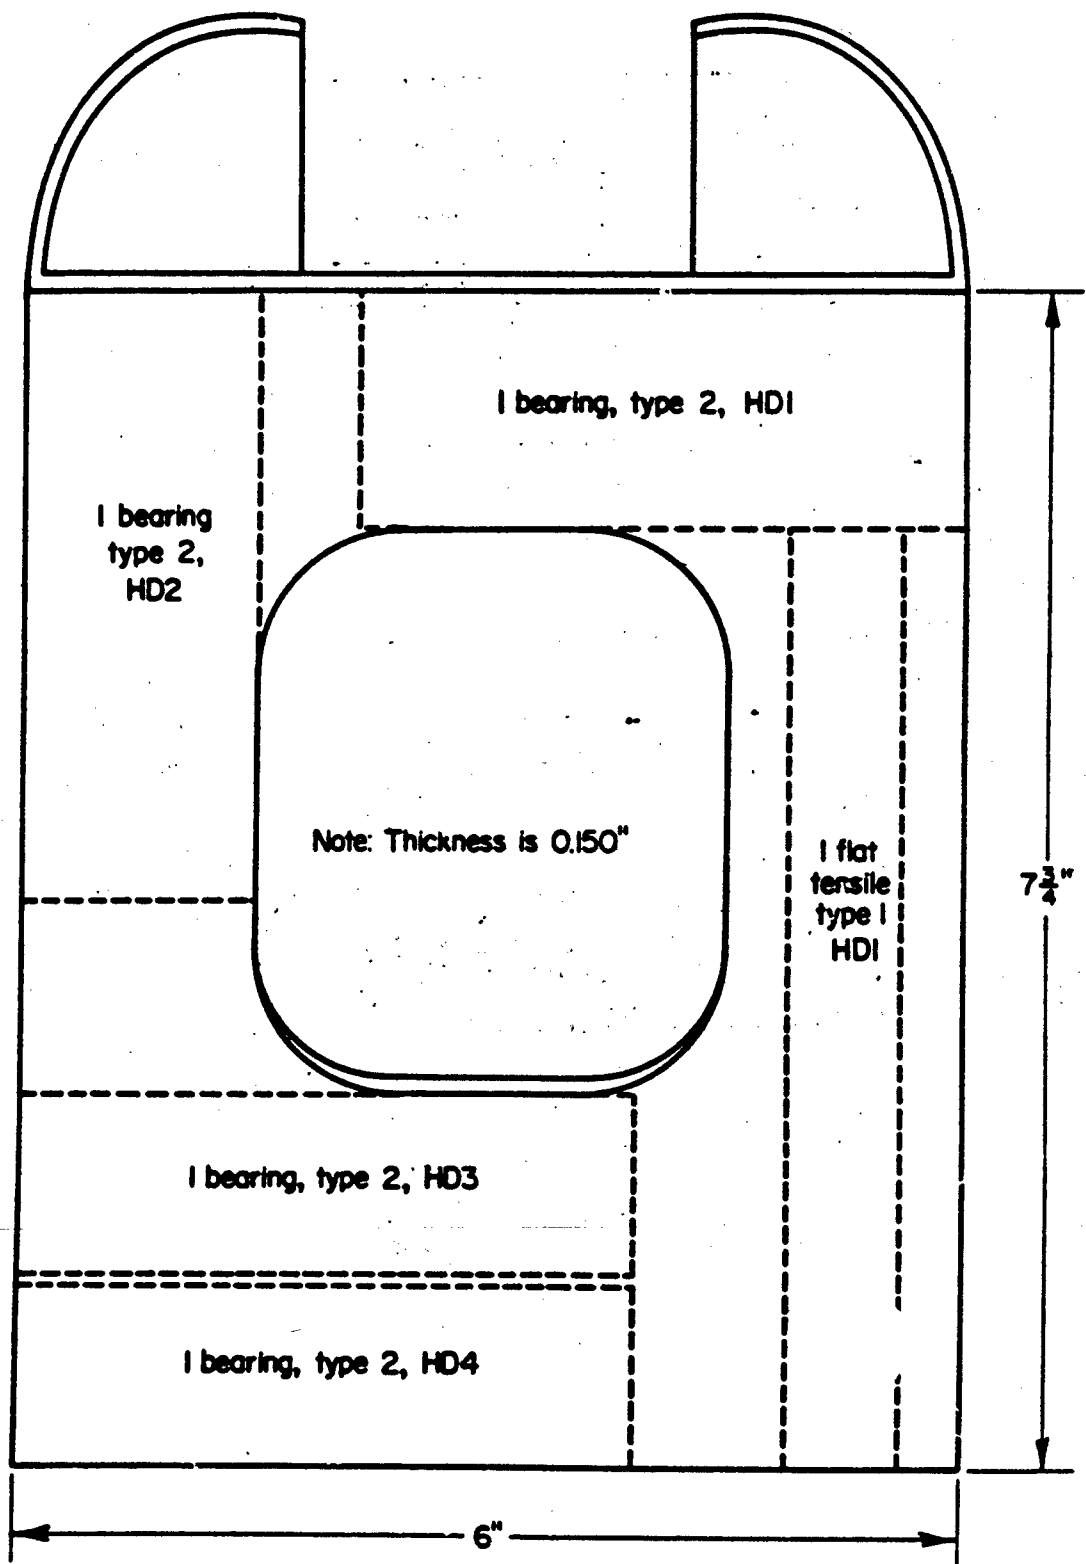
LOCATION OF TEST SPECIMENS FOR CASTING HD
